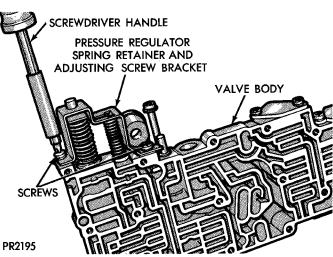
Pressure Regulator and Adjusting Screw Bracket
